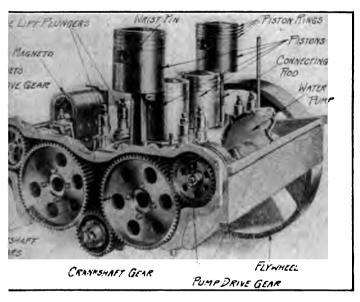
Illustrating Steps in Removing Motor Parts when Disma Power Plant.
